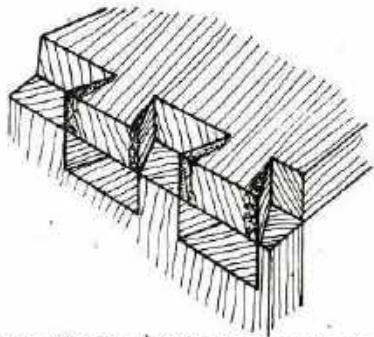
ANGLE OF THE DOVETAILS TO STEEP TAL CORNERS WILL BREAK
